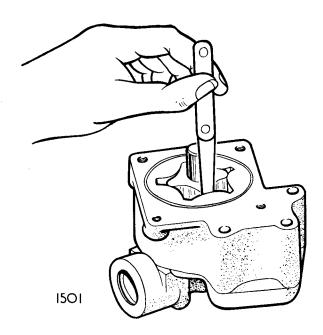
Measuring the clearance between the inner and outer rotors
